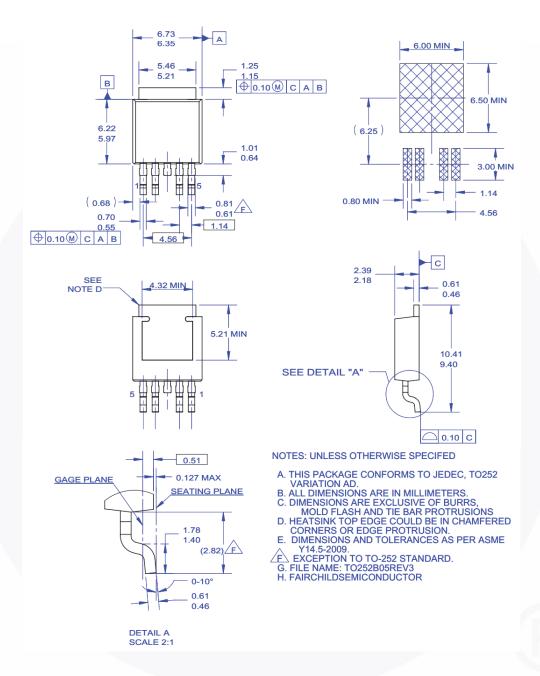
TO252 (D-PAK), Molded, 5-Lead, Option AD
